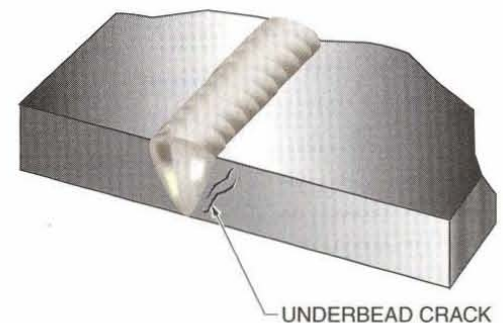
Underbead cracks are cold cracks that form in the heat-affected zone, and generally do not extend to the surface of the base metal.
